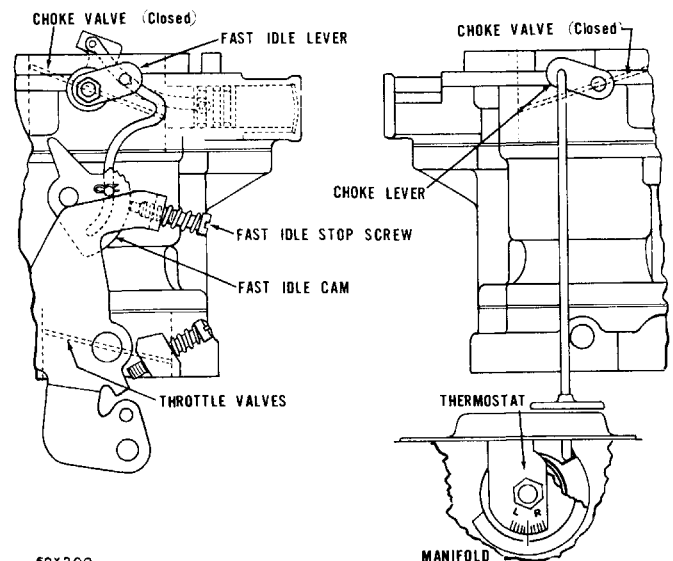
Choke Closed — Cold Engine — Fast Idle
